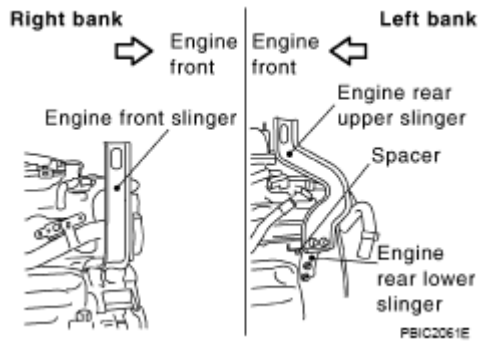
Identifying Engine Slingers Into Front Of Cylinder Head
